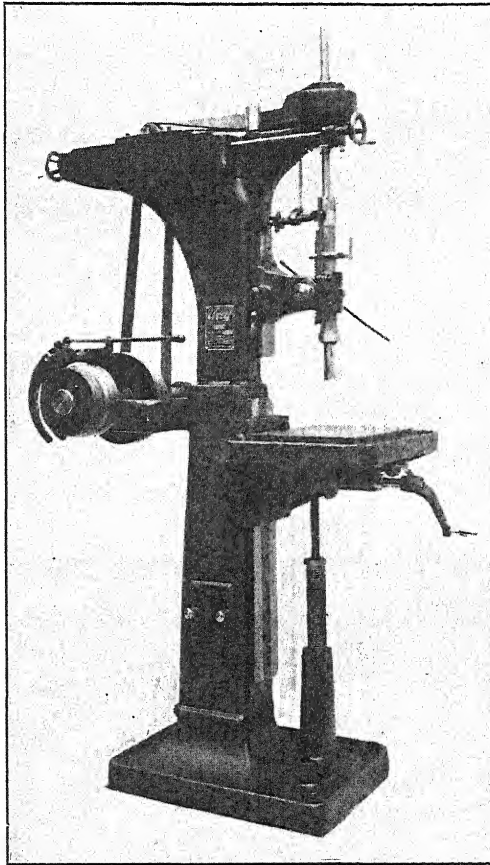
The Avey Drilling Machine Co. No. 2 High-Duty Ball-Bearing Drilling Machine Having a Capacity of a $7\frac{7}{8}$ -In.-Dia. Drill in Cast Iron.
